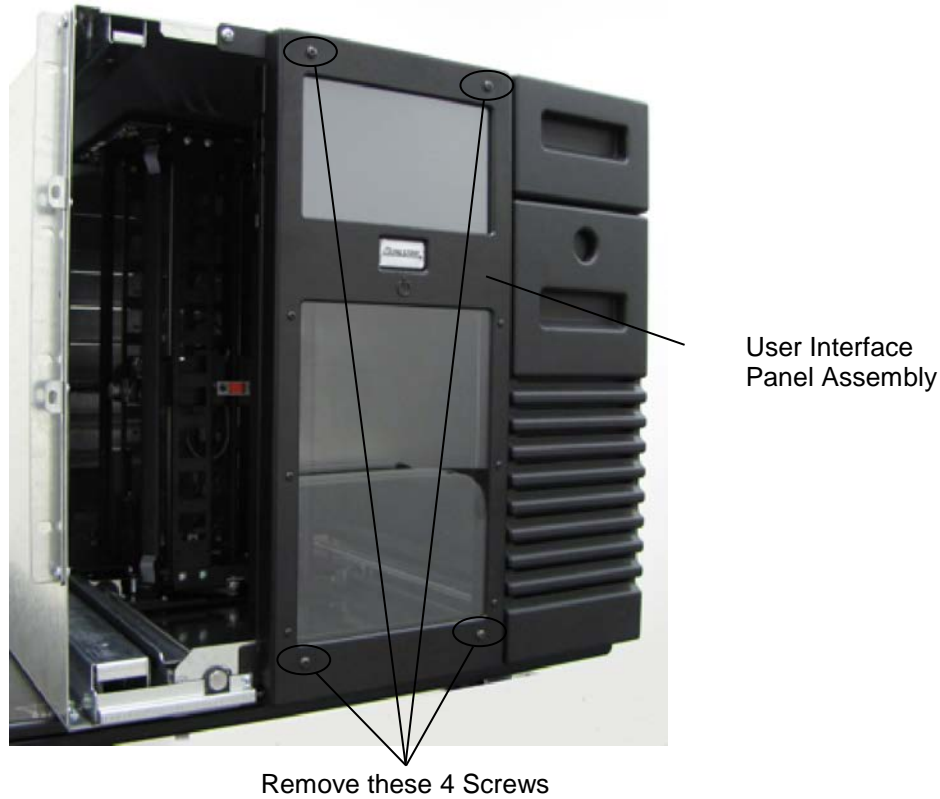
Screws shown securing the face of the User Interface Panel Assembly
